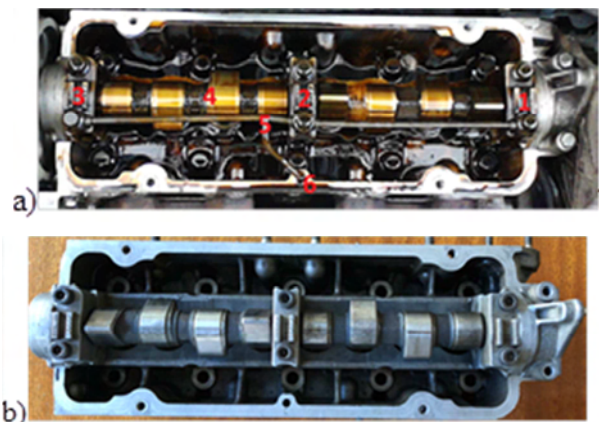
Elements of the valvetrain system in the tested engine a) on the engine, b) outside the engine. 1, 2, 3 – bearing covers, 4 – camshaft, 5 – oil main line for camshaft bearing, 6 – stub at the outlet of the oil channel in the head
